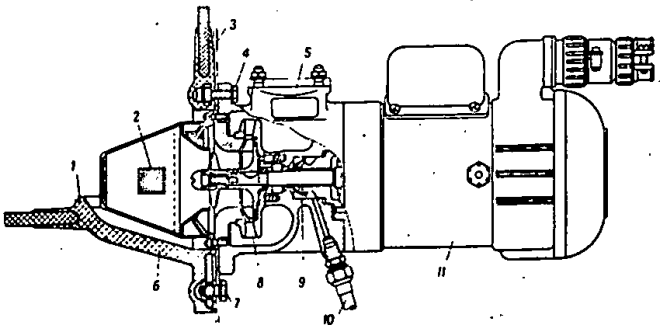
Attachment of Pump 3111-T to Fuel Tank
